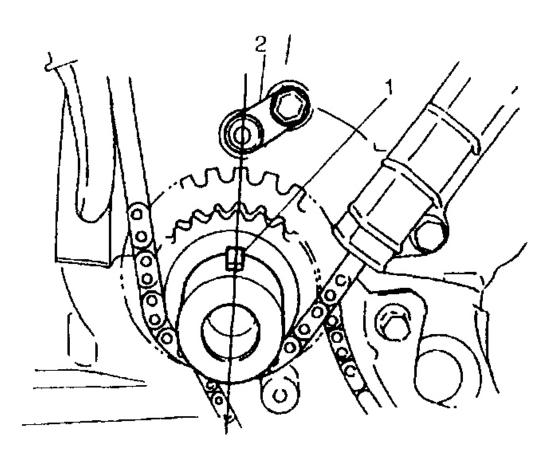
Checking Tensioner Adjuster No. 3 Latch & Tooth Surface Courtesy of SUZUKI OF AMERICA CORP.
